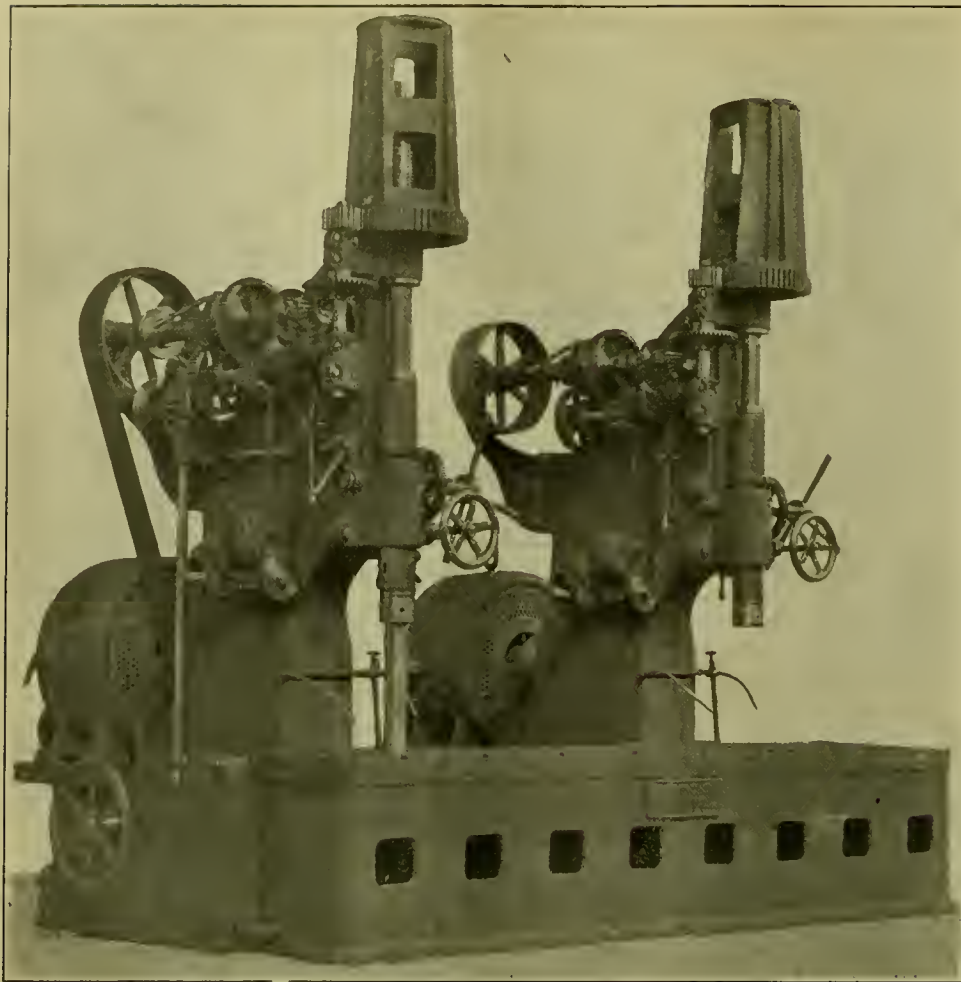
DOUBLE SPINDLE BORING MACHINE.—BAKER BROS.
